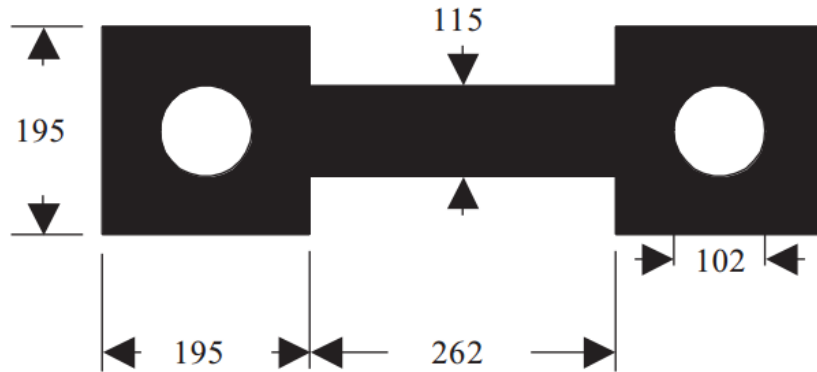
Daisy Chain Pattern Dimensions (microns)
